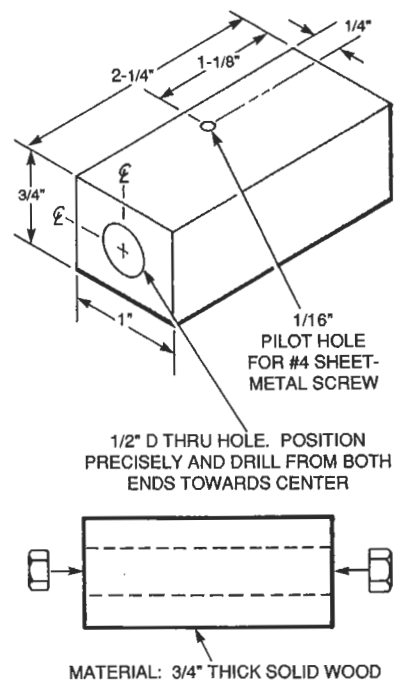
The drill driver, like the table driver (Fig. 8), has a 1/2-inch through-hole.
